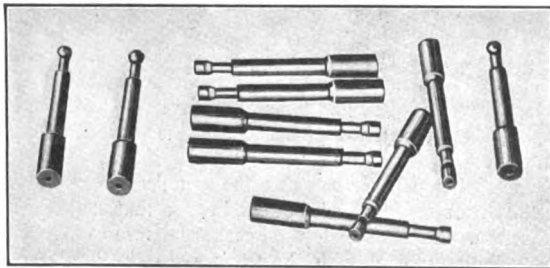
PINS CENTERED AND DRILLED IN THE MACHINE
